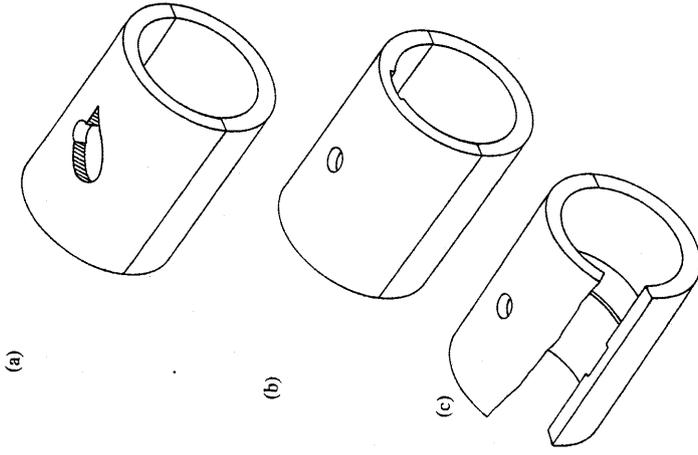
Oil supply arrangements in plain journal bearings: (a) single oil hole; (b) axial oil feed pocket; and (c) circumferential oil feed pocket.
